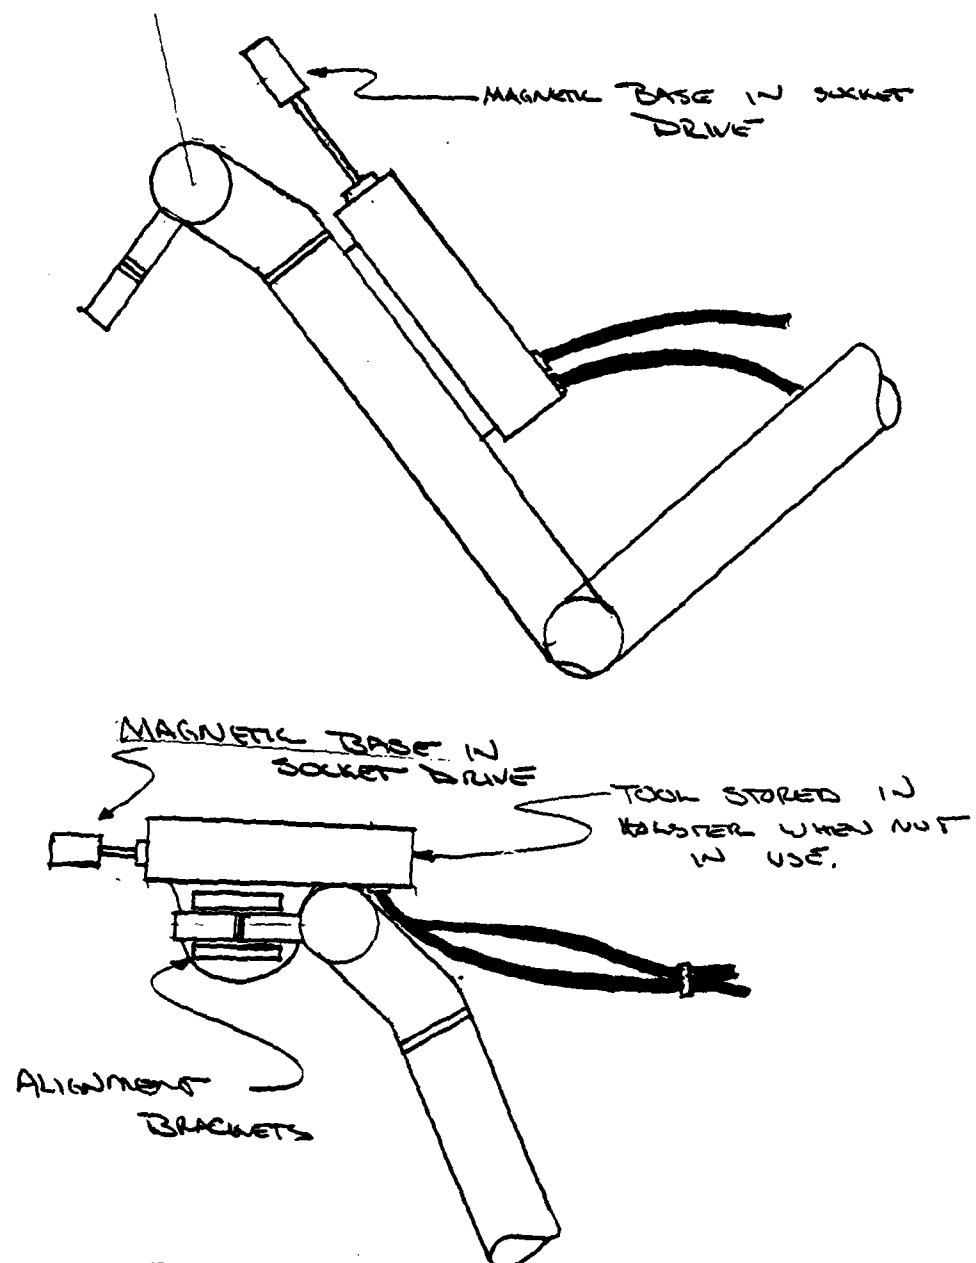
HYDRAULIC NUT DRIVE CONFIGURATION
